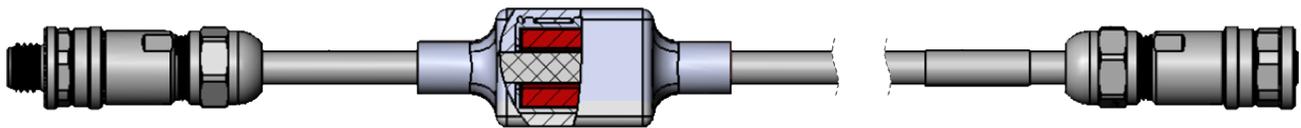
VitalyX FPS Cable Assembly (OS-05-04-12)
